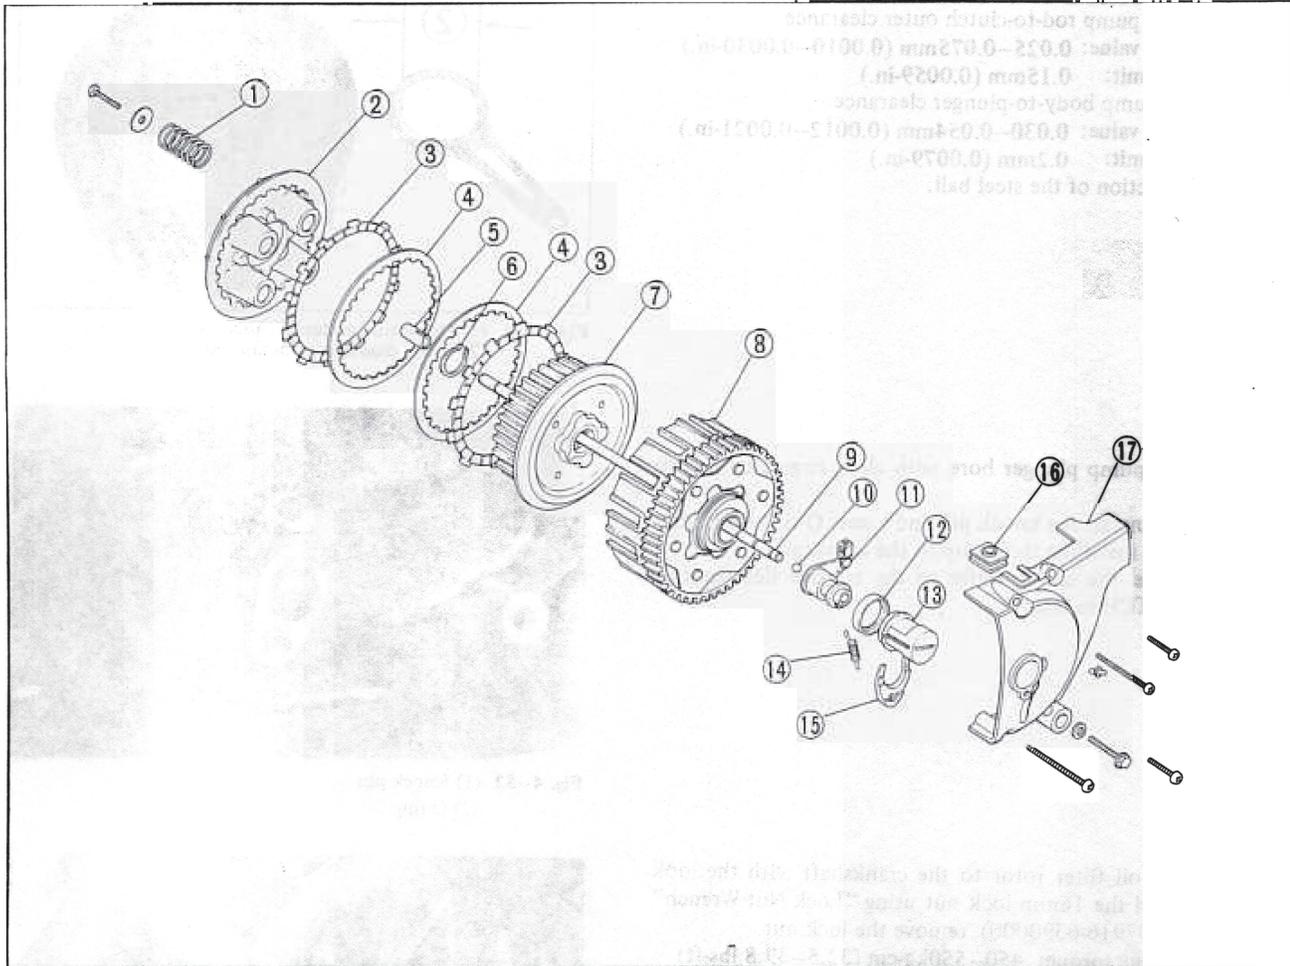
(1) Clutch spring (2) Clutch pressure plate (3) Friction disc (4) Clutch plate (5) Lifter joint piece (6) Snap ring (25mm) (7) Clutch center (8) Clutch outer (9) Clutch lifter rod (10) Steel ball (5/16") (11) Clutch lifter (12) Oil seal (22 x 26 x 29 x 8mm) (13) Clutch adjuster (14) Clutch lever spring (15) Fixing piece (16) Clutch cable joint (17) Crankcase rear cover
